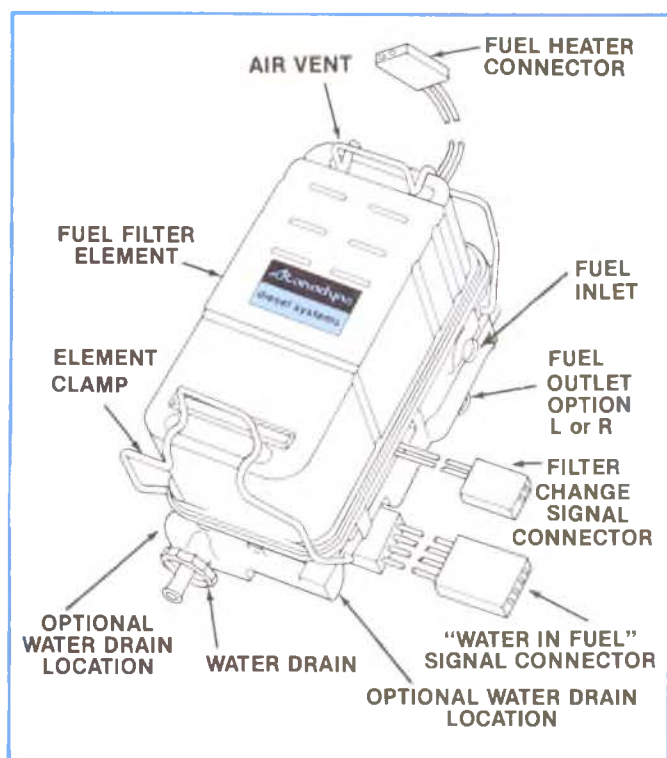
, Model 80 Fuel Filter and Base Assembly.
